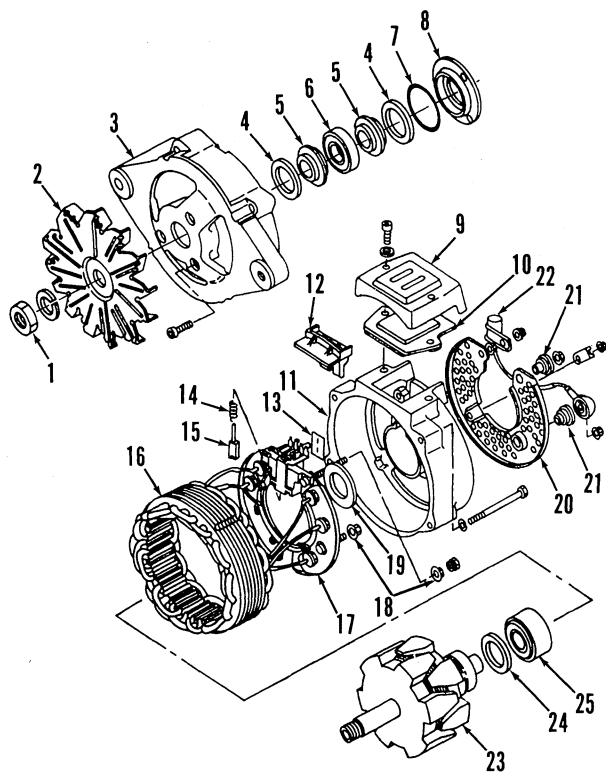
Exploded view of John Deere alternator used on tractors equipped with Sound-Gard body.
